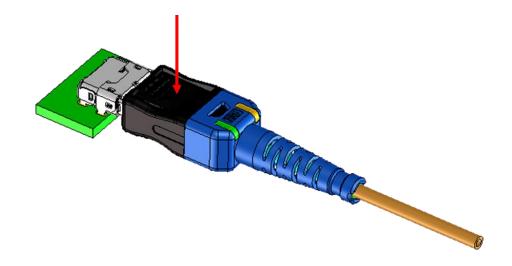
(A). BF4-IR2 Plug Lock Location
